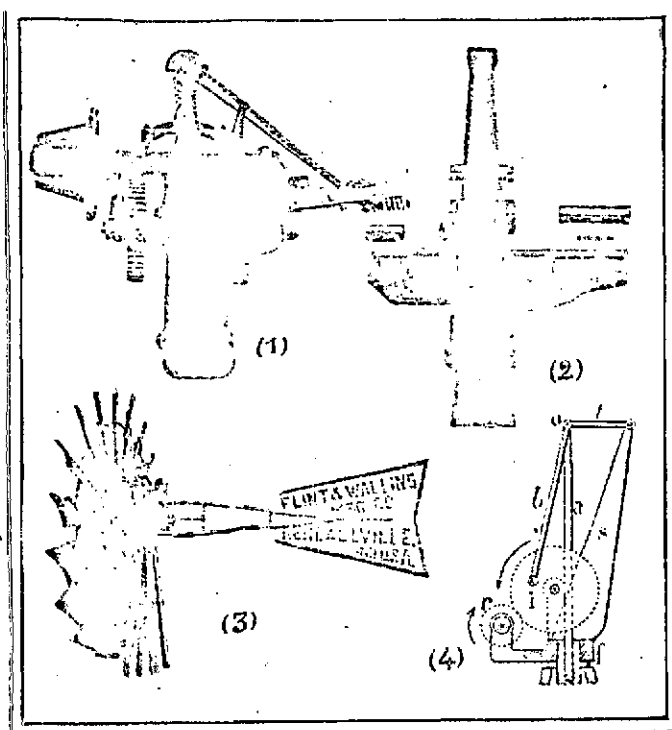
Mechanism manufactured by the Flint and Walling Company. Key. 1. Top view; 2. View of head serving as a pivoting mounting; 3. View of assembly rigged into the wind; 4. Diagram of mechanism: f. Base and head of pylon; r. Shaft of wheel and drive gears; i. Reduction gears; b. Double connecting rod; a. rod of pump; o. Attack cross-beam of connecting-rods; t. Oscillating guiding beam; s. Mounting.
